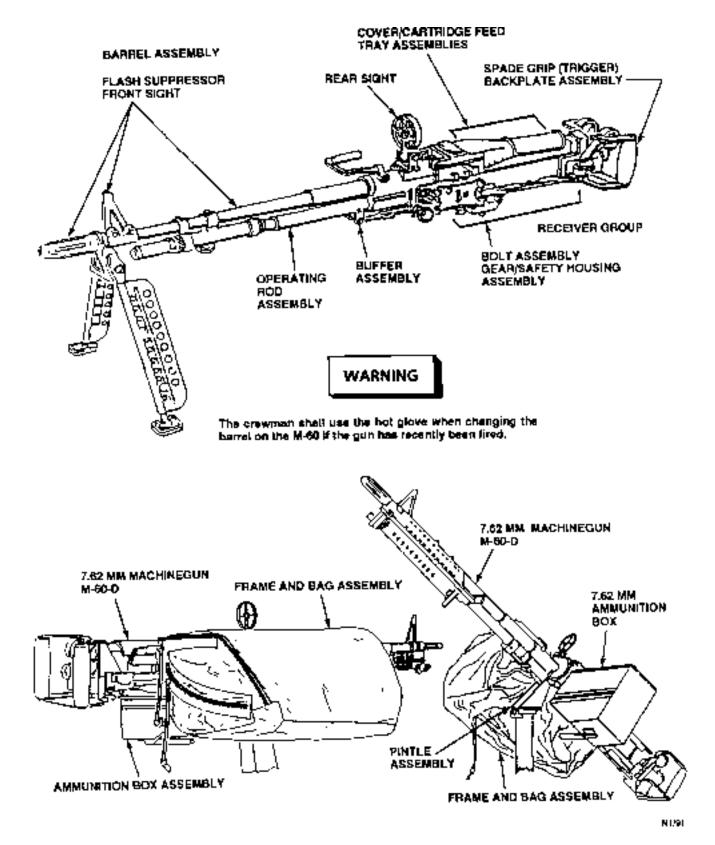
(NON-ET) M-60-D Machinegun, 7.62 Millimeter (Sheet 1 of 2)
